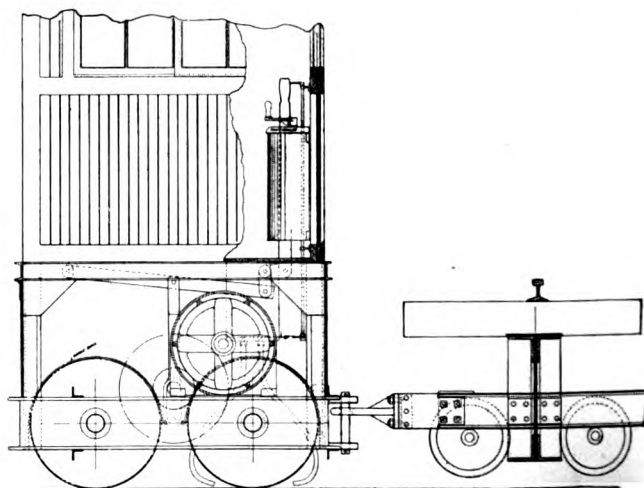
Turntable in Its Highest Position Relative to the Tractor.
